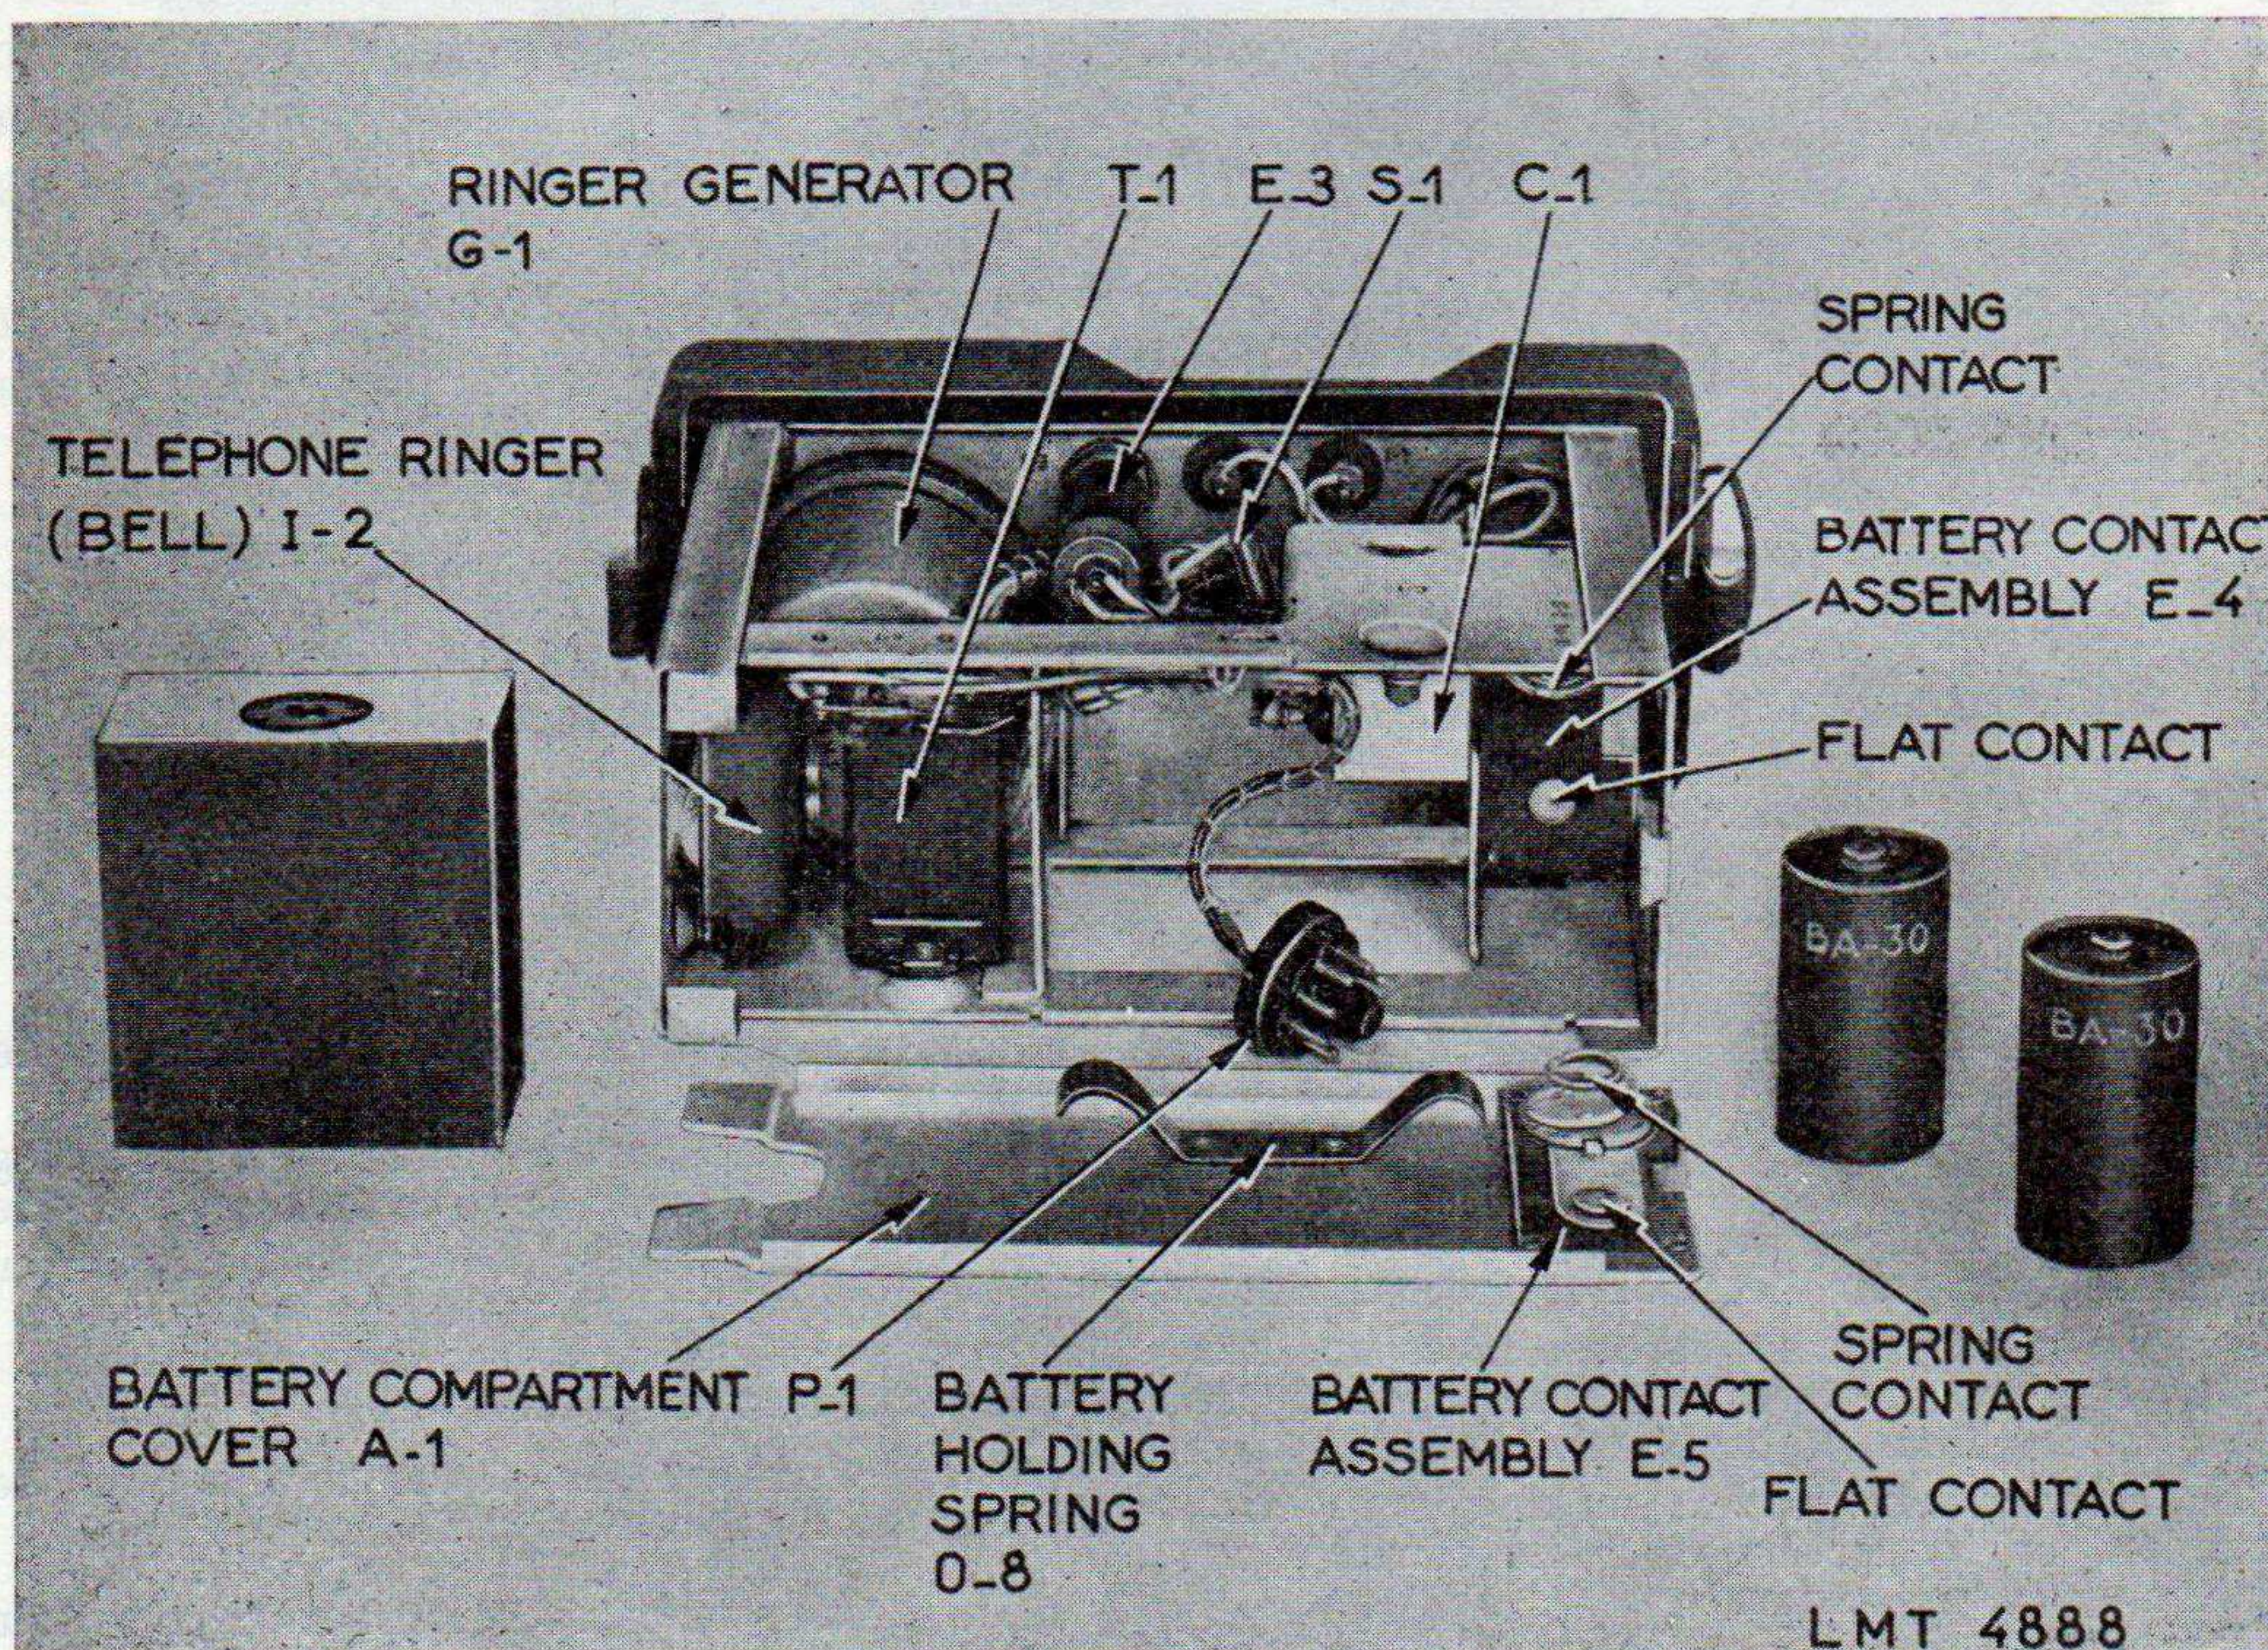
Remote Control C-433/GRC, rear view of panel-and-chassis assembly, battery compartment cover and batteries removed.
